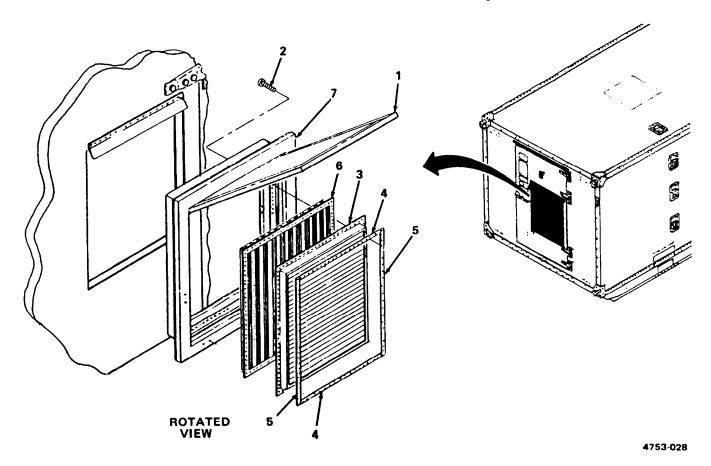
Intake Louver Assembly and RFI/EMI Filter Replacement.
